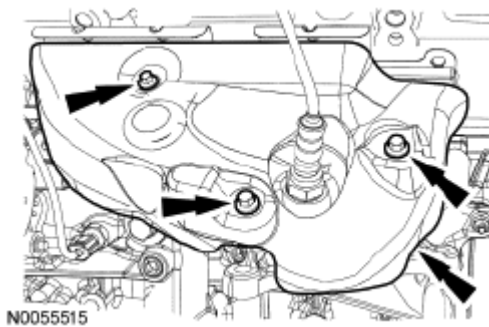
Locating LH Exhaust Manifold Heat Shield Bolts
